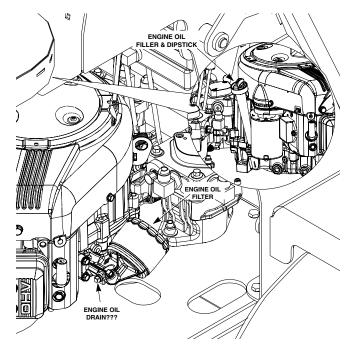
Drain Plug, Dipstick and Oil Filter Location (check)
